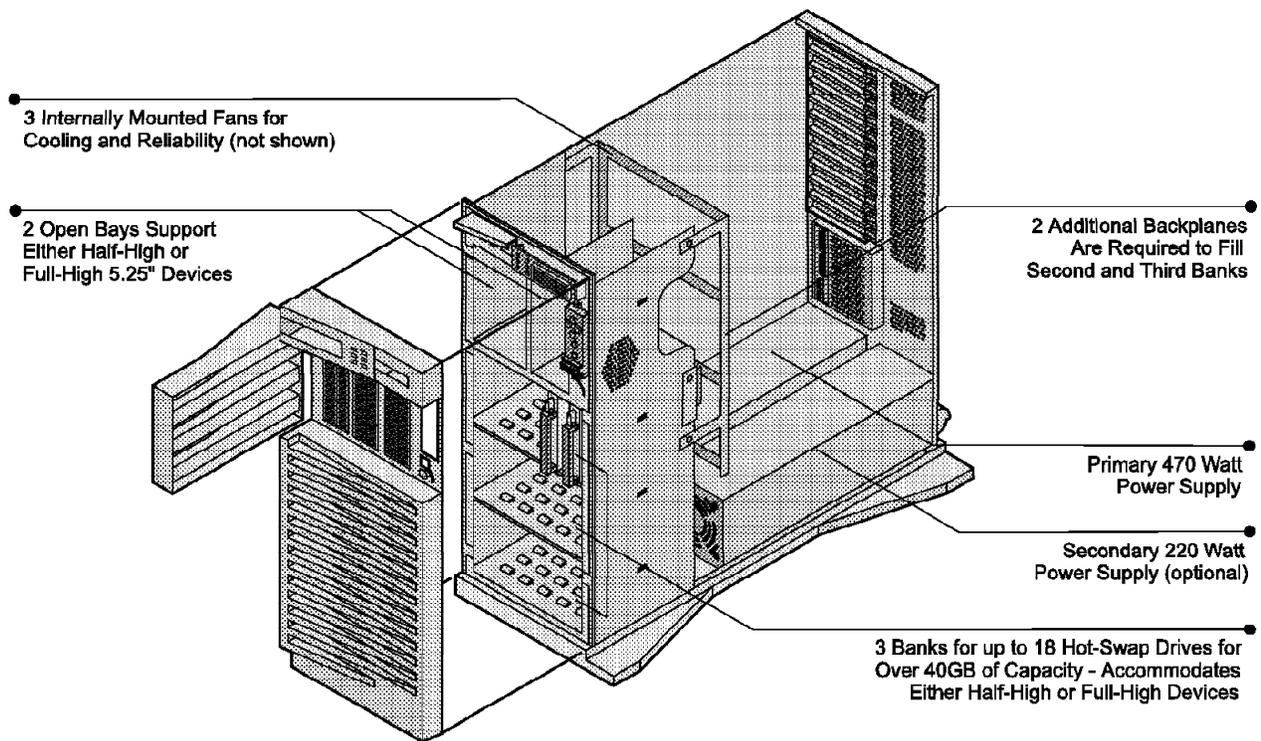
Exploded View of the IBM 3518 PC Server Enterprise Expansion Enclosure
